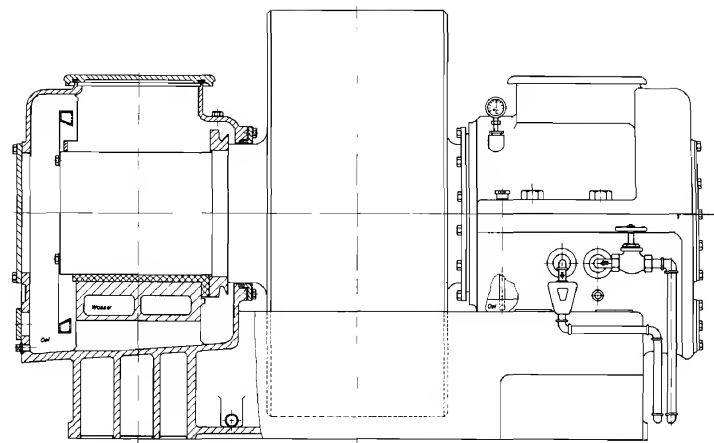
Bearing pedestal for kiln rollers (KHD Humboldt Wedag AG, Cologne)
